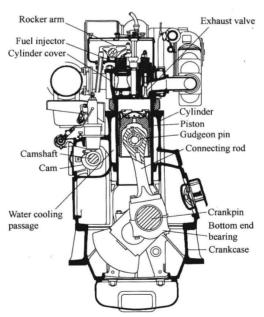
Cross-section of a four-stroke diesel engine
